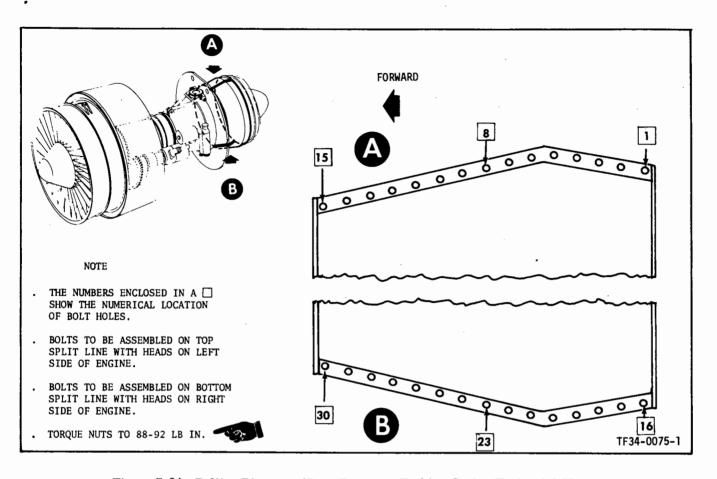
Bolting Diagram - Low-Pressure Turbine Casing Horizontal Flanges
